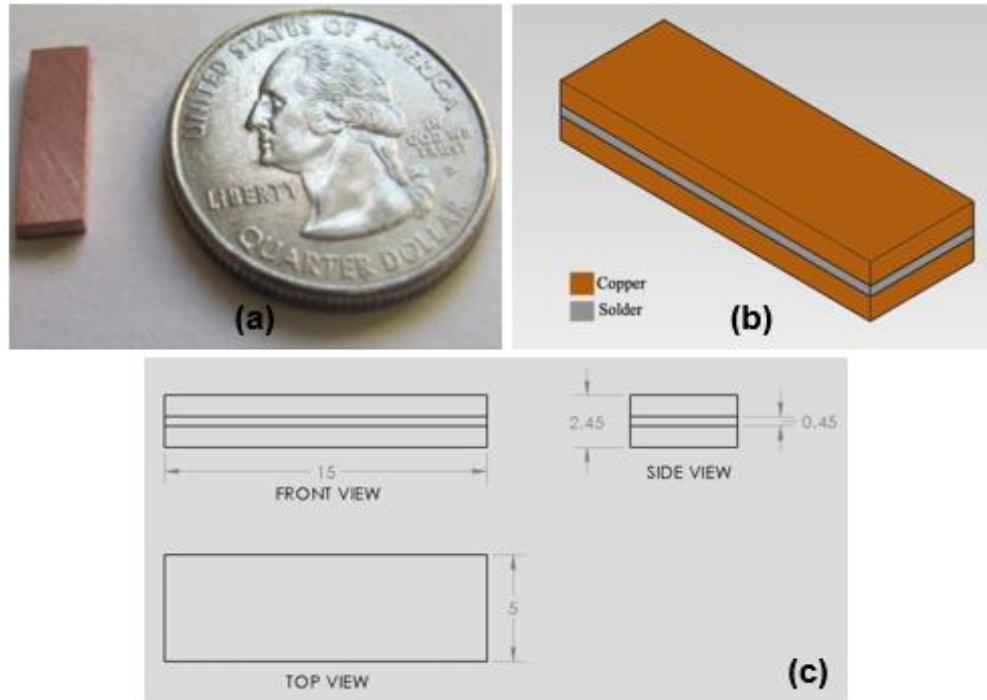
(a) Actual specimen design, (b) & (c) Schematic drawing of specimen. All dimensions are in mm.
